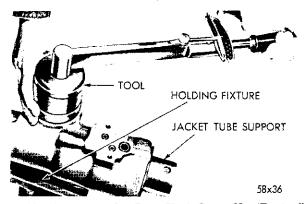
Removing the Gear Shaft Cover Nut (Typical)
